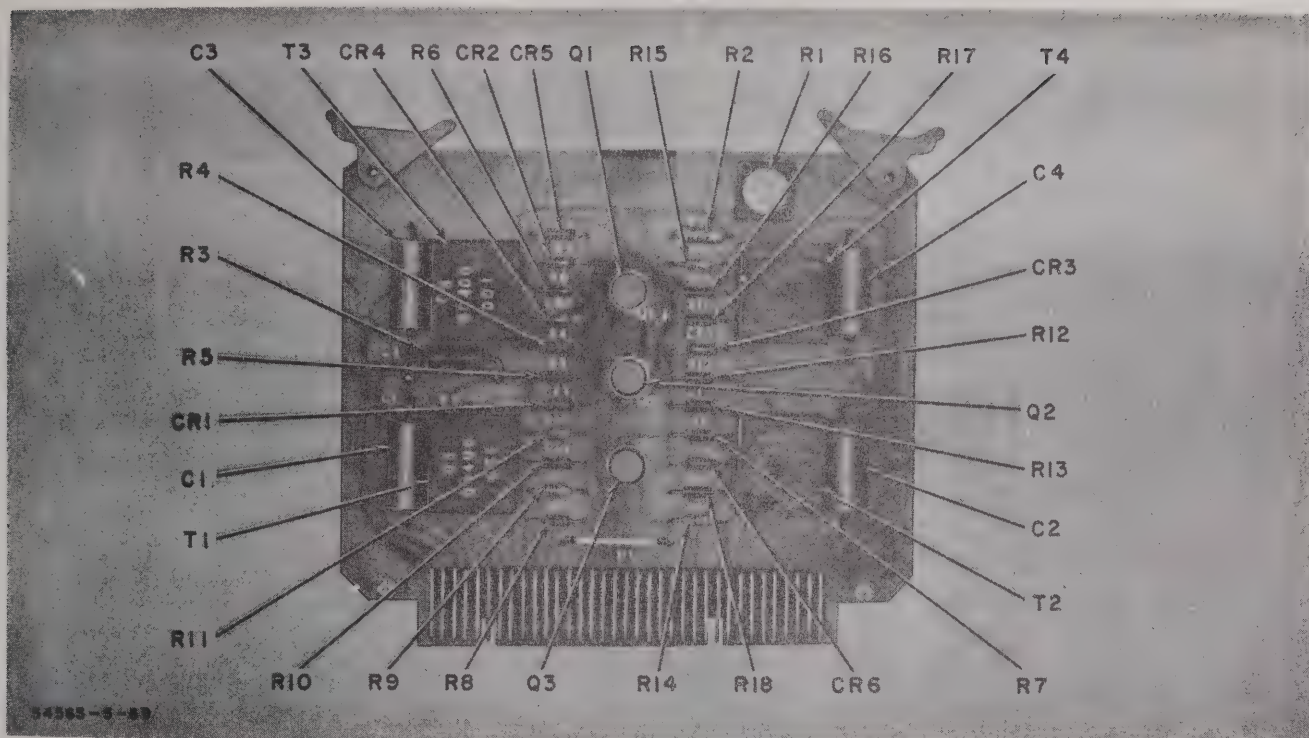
Transformers and Light Drivers Printed Wiring Board A5,
